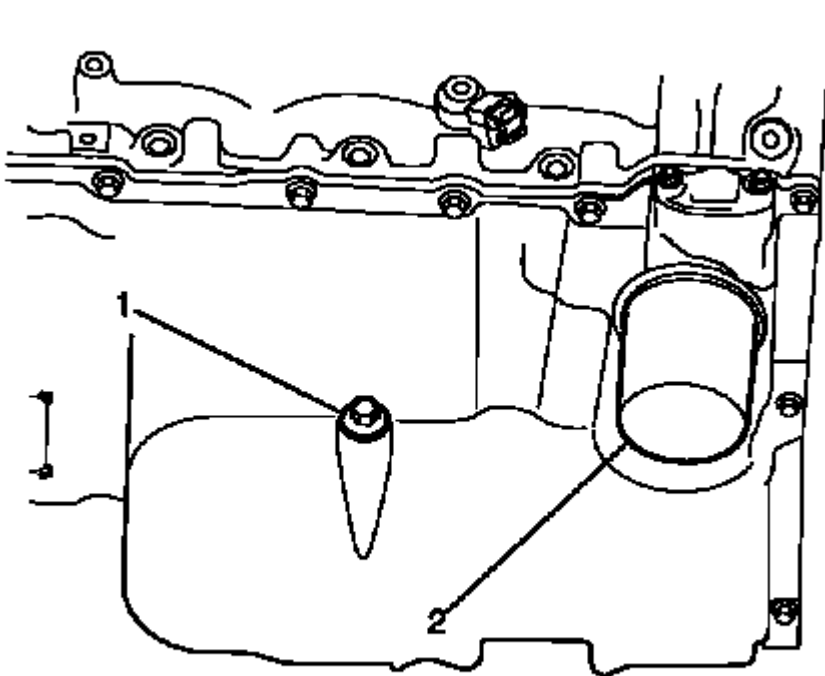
Identifying Oil Filter & Oil Pan Drain Plug
